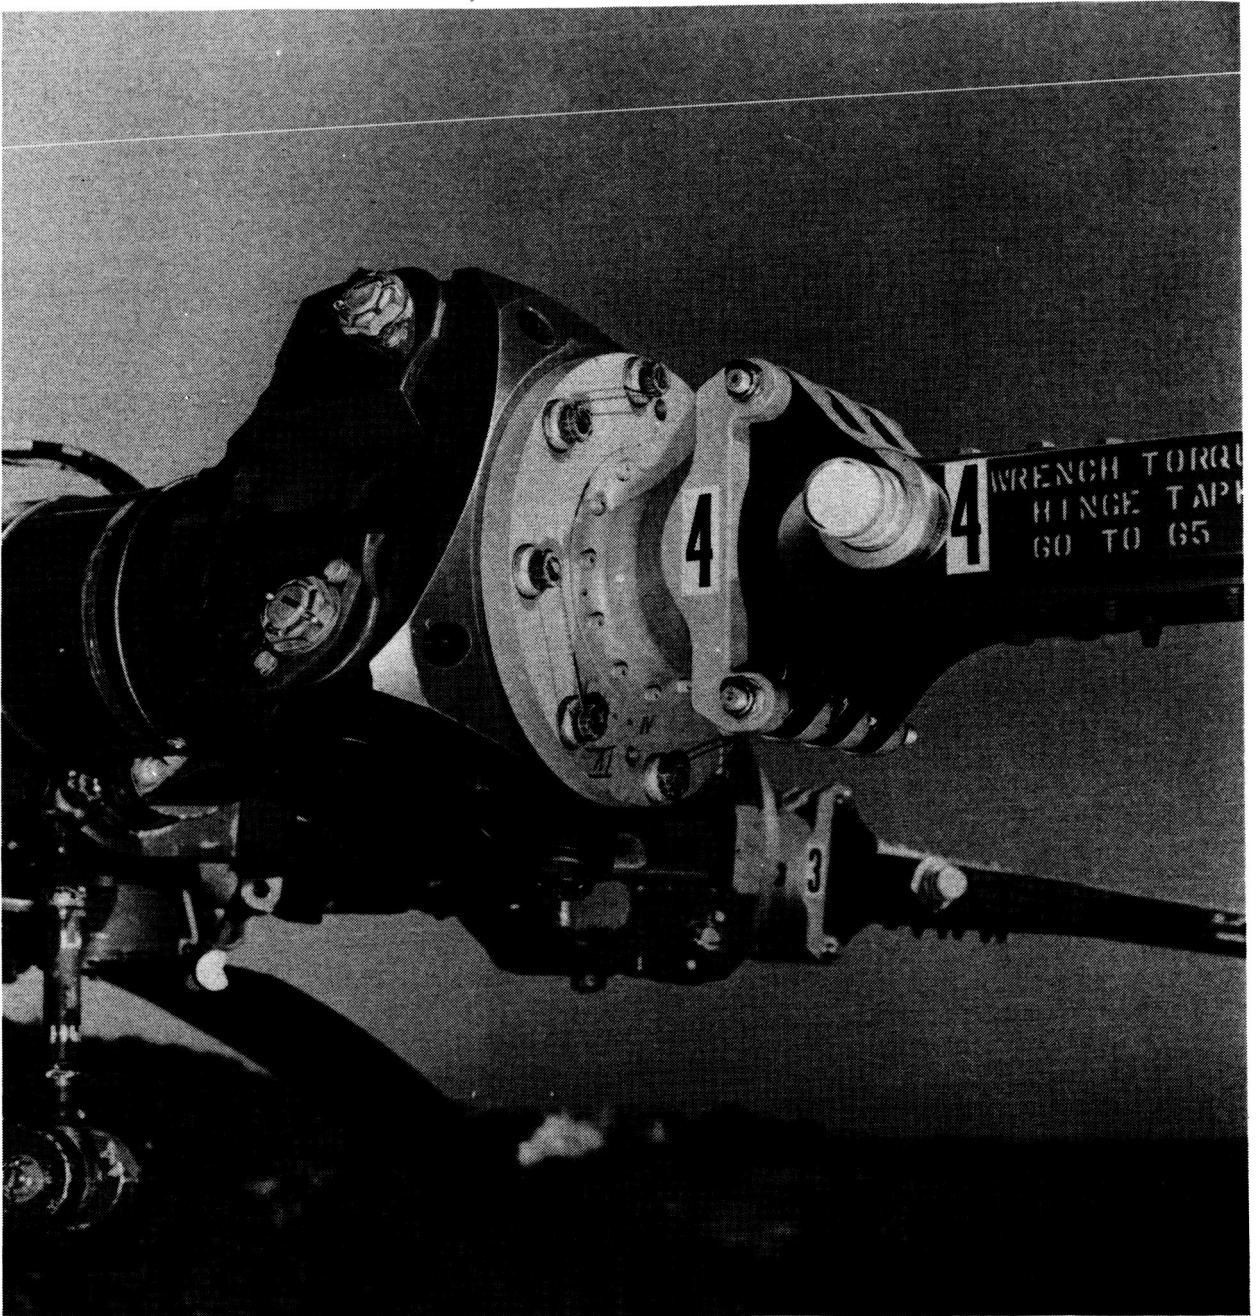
BLADE-ROTOR HEAD ADAPTERS FOR TEST
